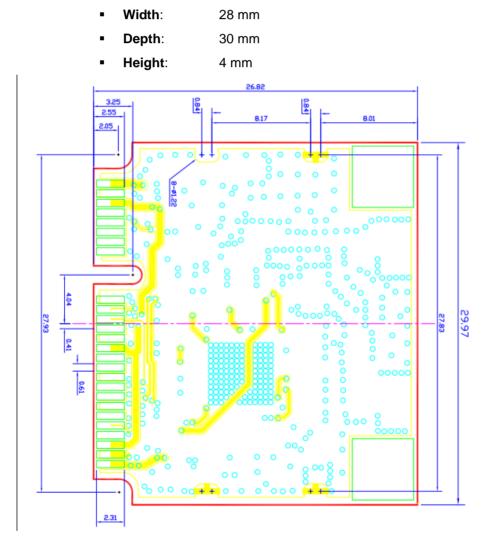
WIFI-RT5392-SB Dimensions (mm)
